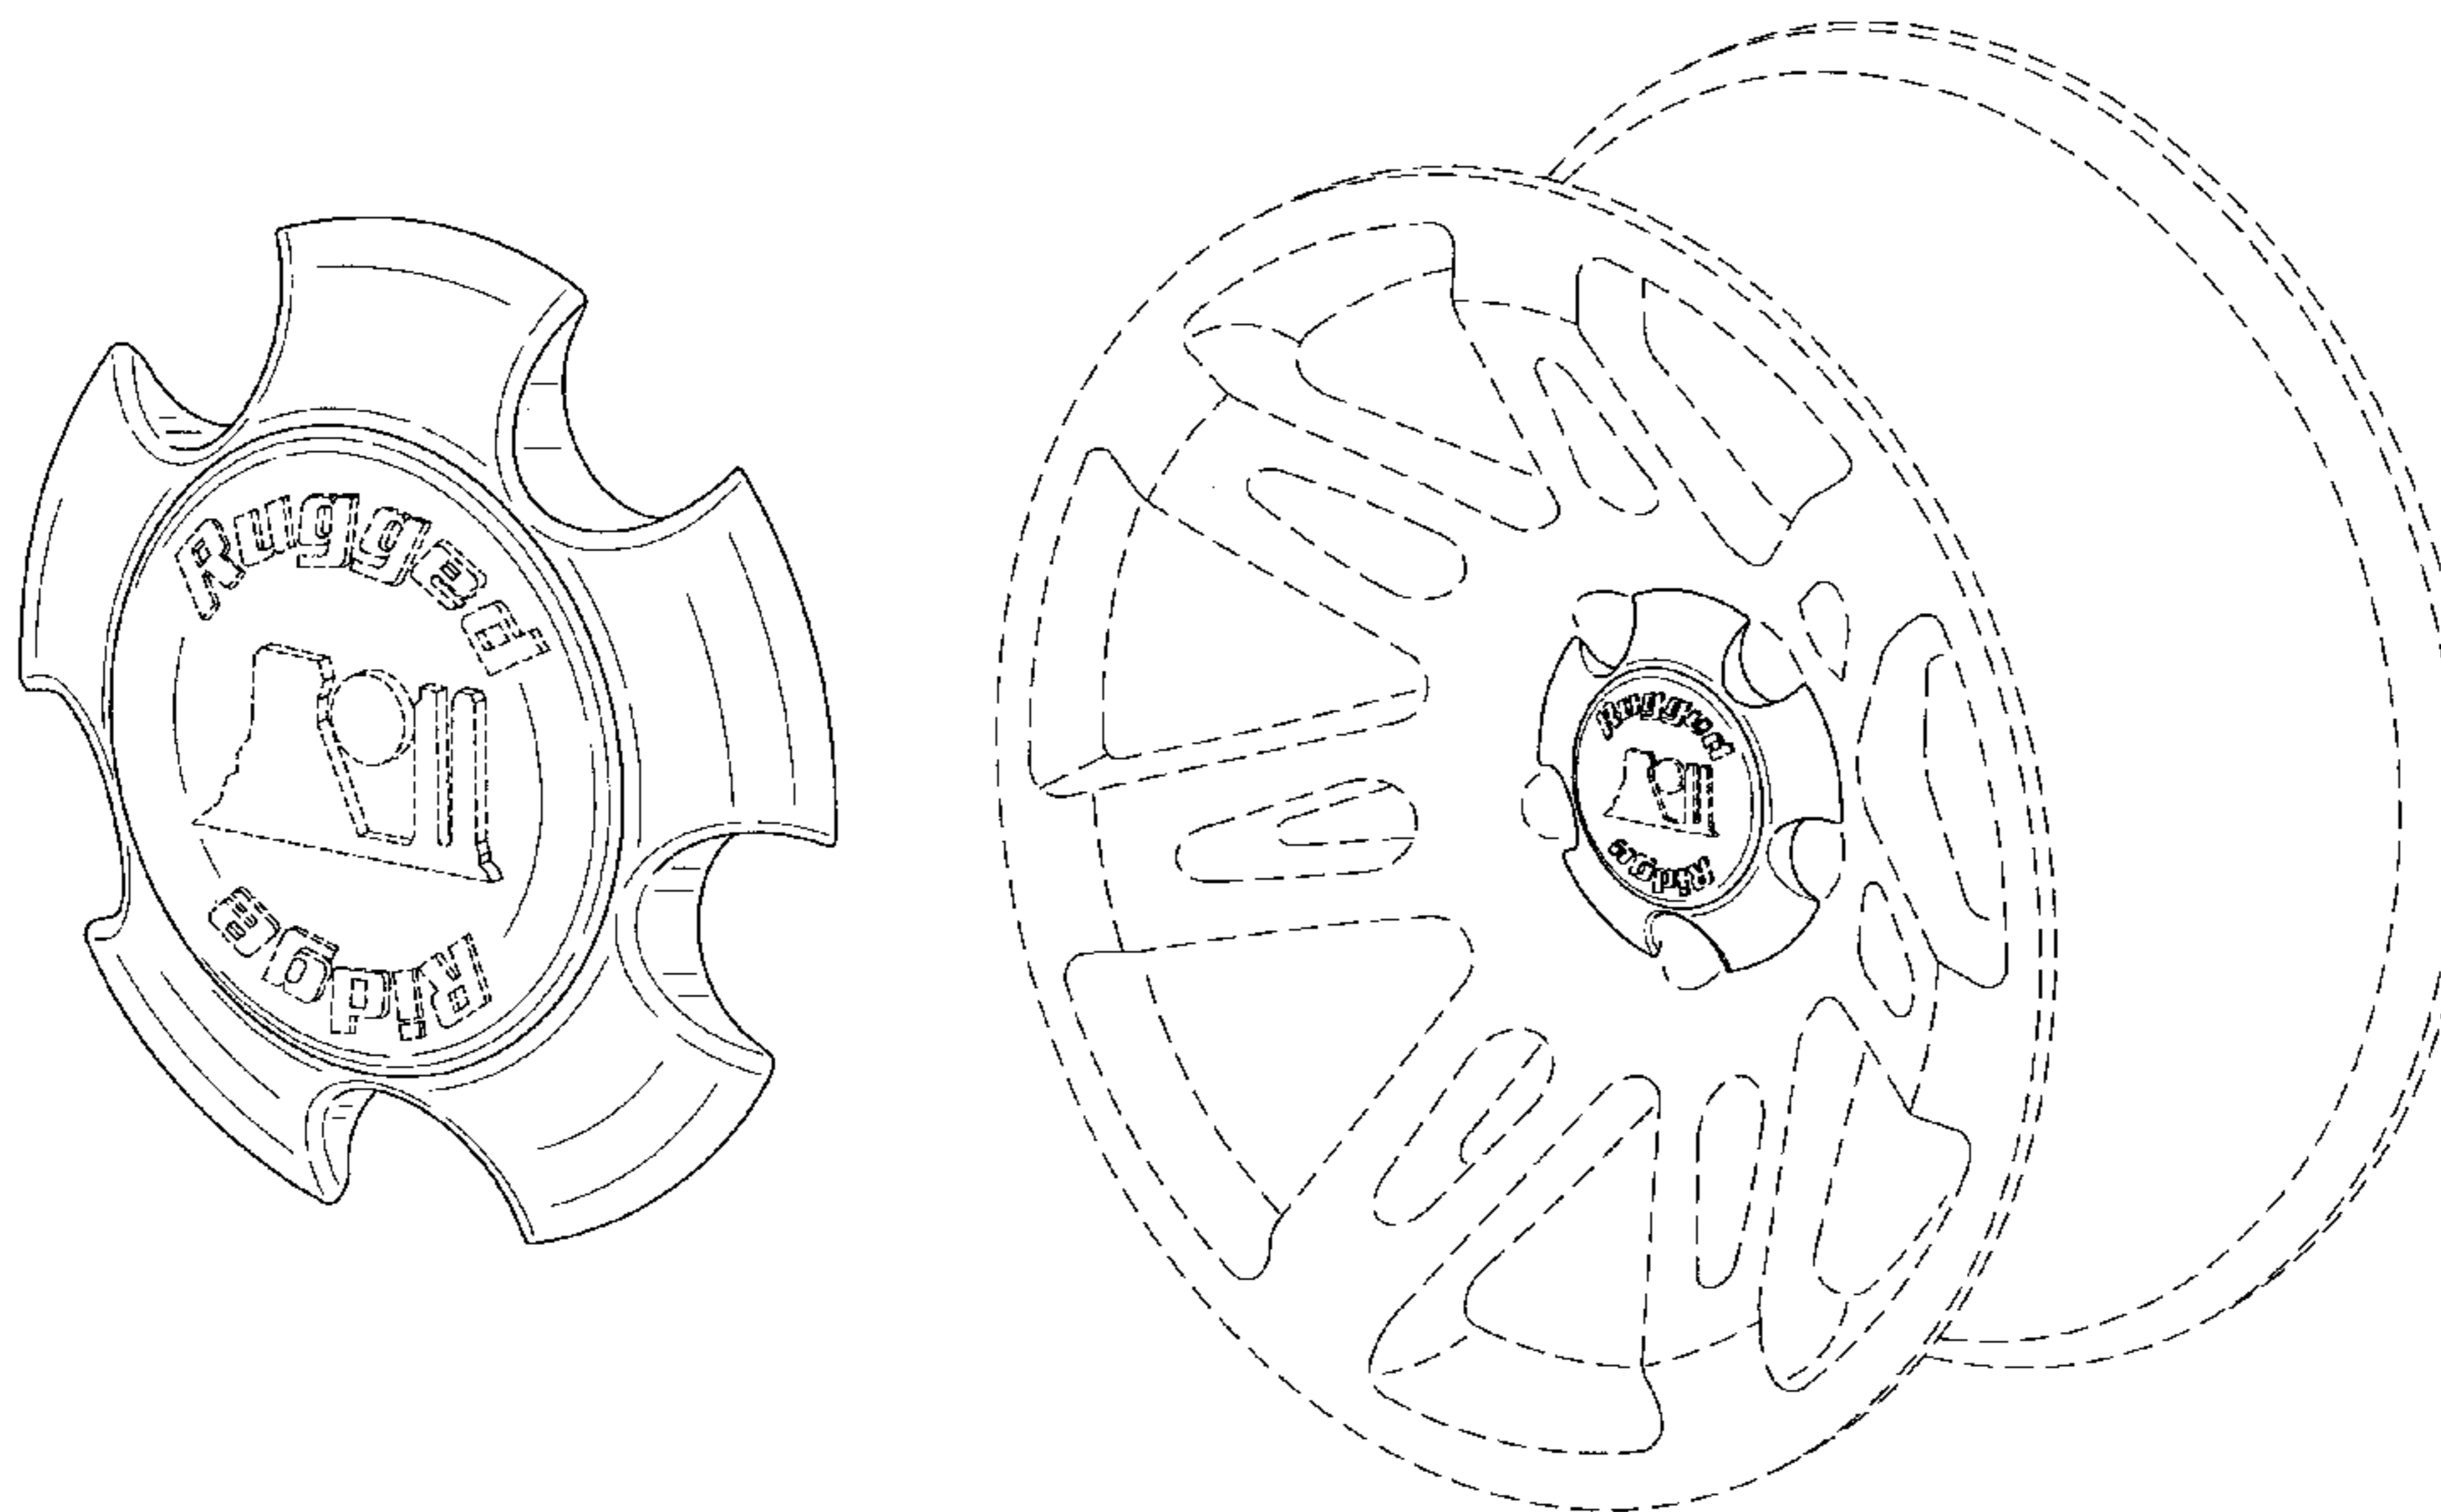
is a perspective view of a wheel center cap, showing our new design.
